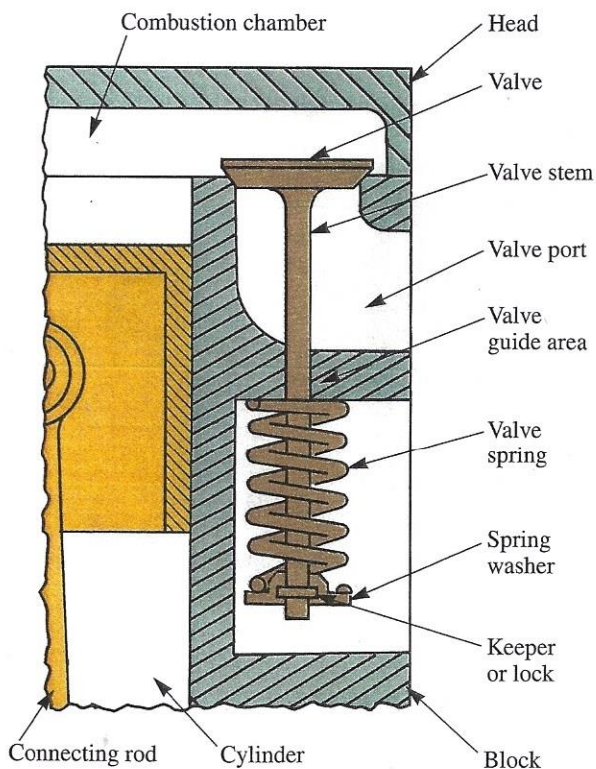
Valve spring keeps tension on valve to ensure proper seating. Valve spring keeper and washer hold spring in place and permit removal when necessary.
